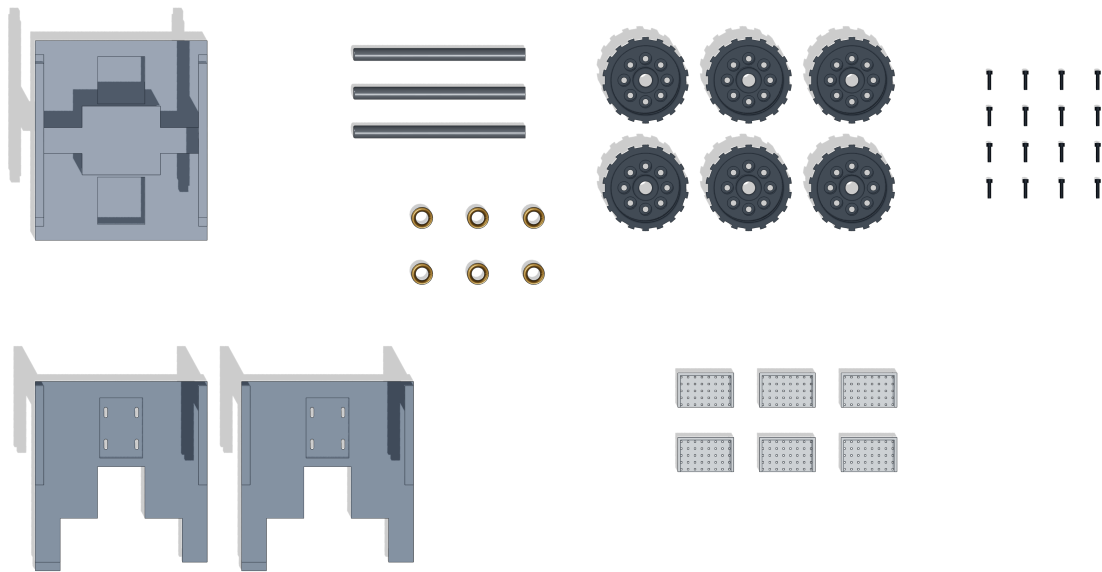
Exploded view of the prototype showing all manufactured and purchased components: mid frame, three shafts, six wheels, the six journal bearings purchased for the original arrangement, fasteners, two mirrored side frames and six sheet steel reinforcing braces.
